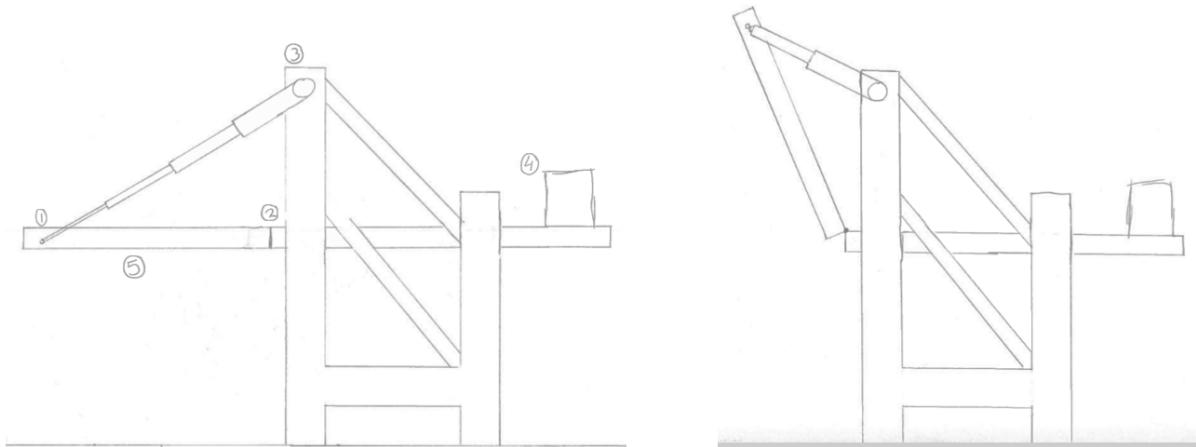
Side views whole crane: left with boom horizontal, right with boom lifted
